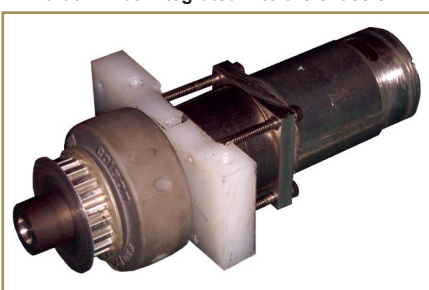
A modified drill gearbox on a mount that will be integrated into the chassis.
